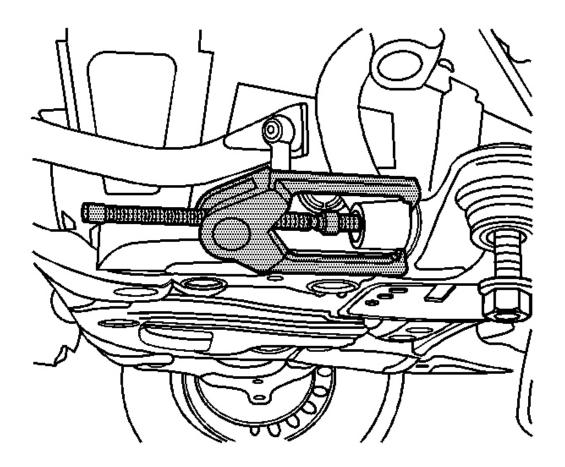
Disconnecting Shock Module Yoke From Lower Control Arm Courtesy of GENERAL MOTORS CORP.
